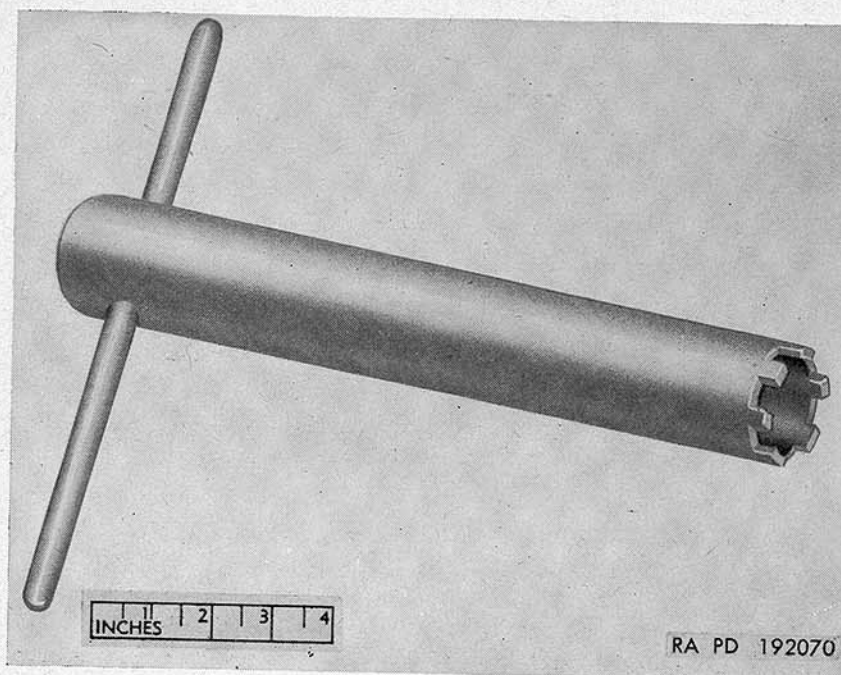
Recoil spring retainer face spanner wrench—7188572.
